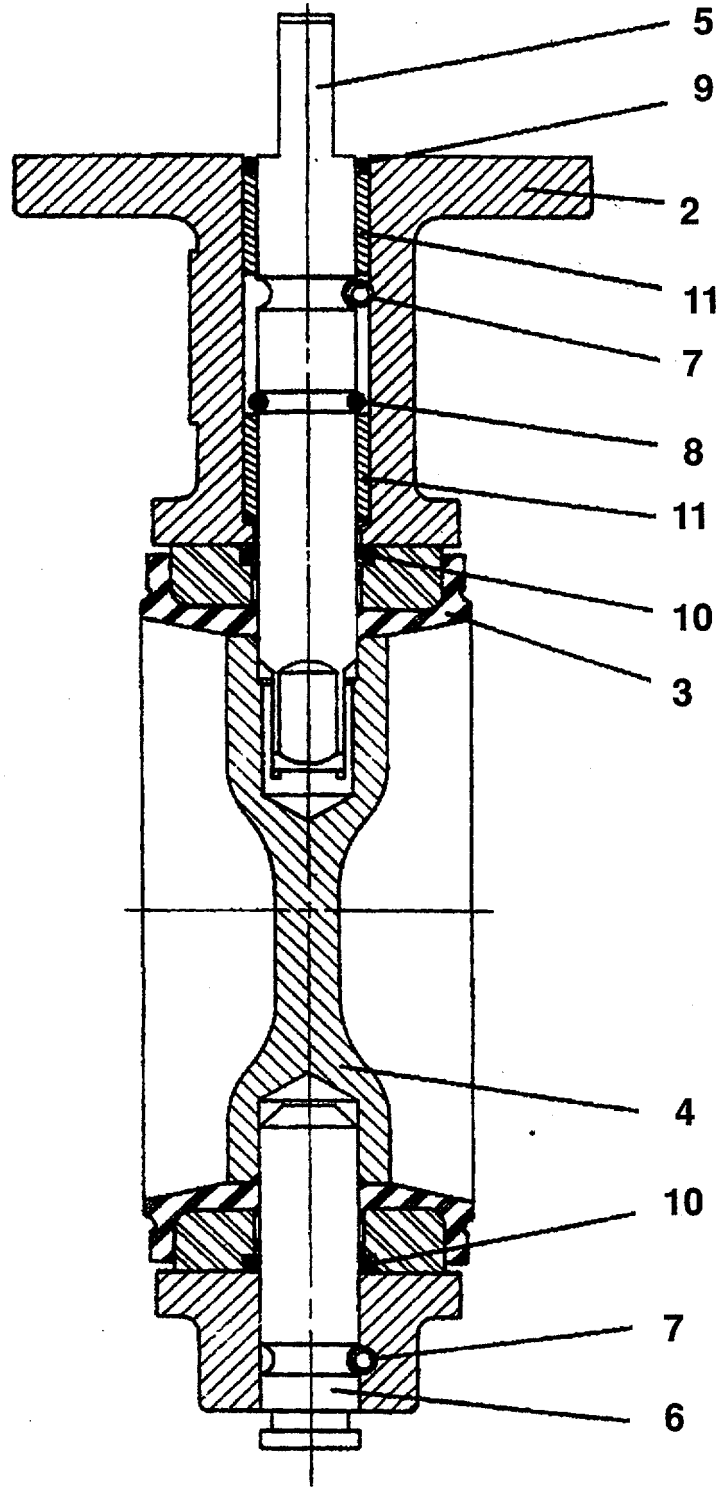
6in. Gear Operated Butterfly Valve (Sheet 2 of 2).
